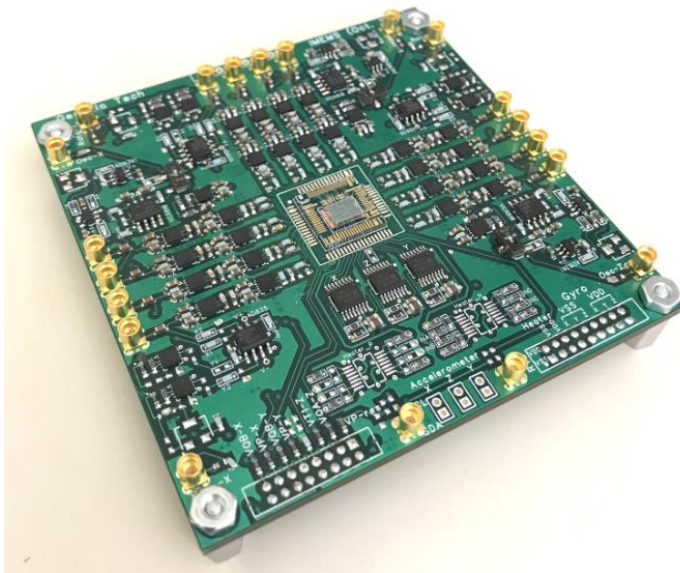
The layout floor plan of the 6-DoF TIMU prototype board.
